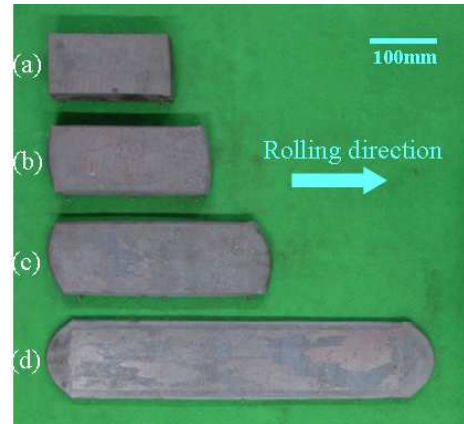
Plane-view shape of plate rolled by pilot rolling test: (a) specimen after the 1st rolling pass (b) specimen after the 2nd rolling pass (c) specimen after the 3rd rolling pass (d) specimen after the 5th rolling pass
